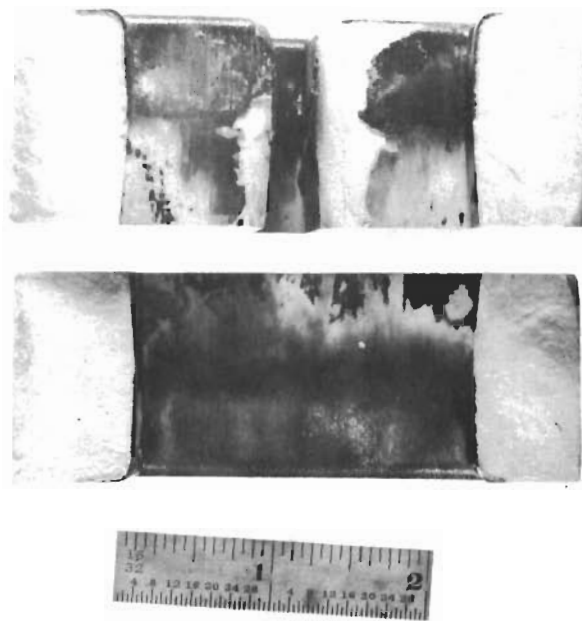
Internal View of Tested  $ZrO_2$  Die.
